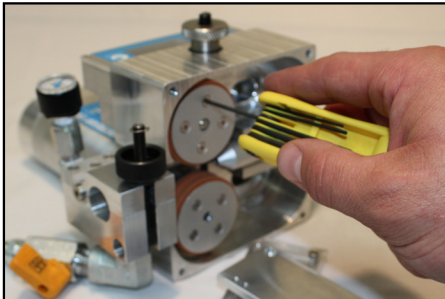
Remove the 4 Screws on the Side Plate of the Rollers
